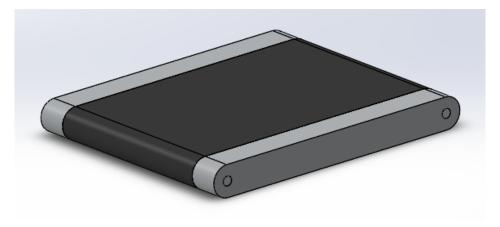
Appearance of the Internal Conveyor Belt on the Platform
